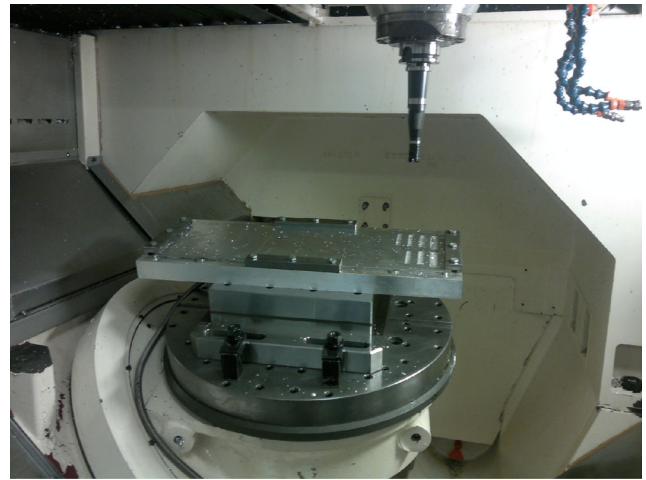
Kistler dynamometer fixed on the CNC machine bed (model-HURON KX8)
